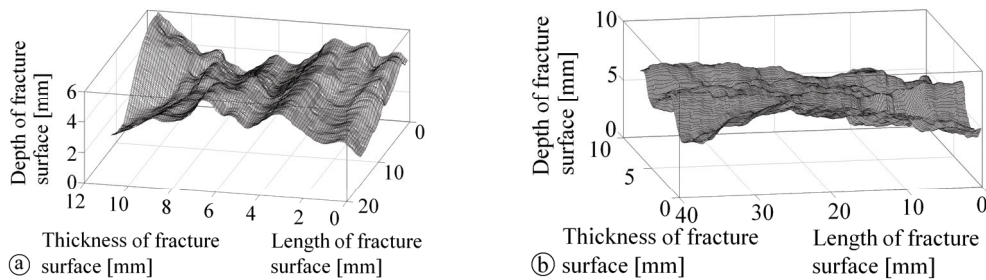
Digitized fracture surface of (a) specimen no. 12 and (b) specimen no. 1
